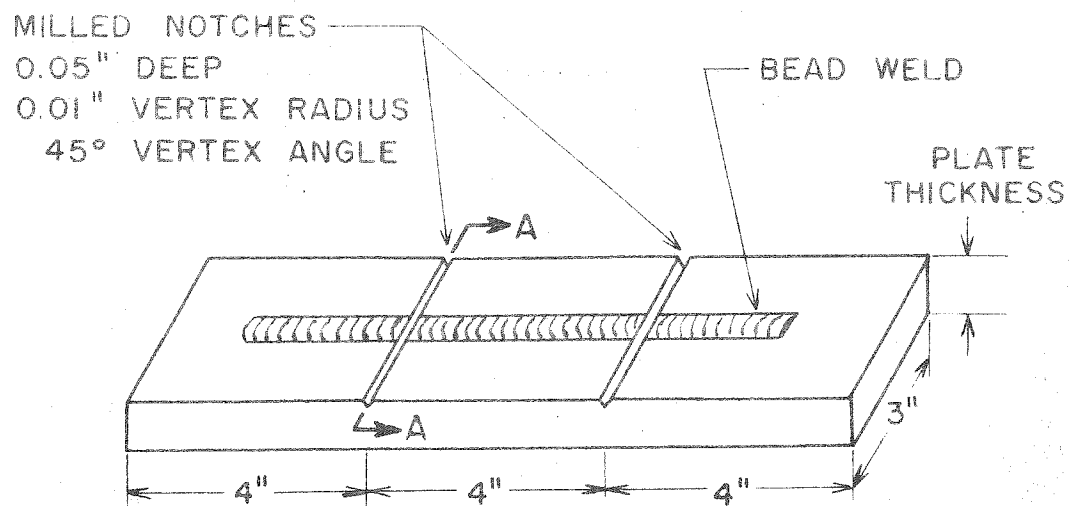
Details of Kinzel Type Longitudinal-Bead-Weld Notch-Bend Specimen.
